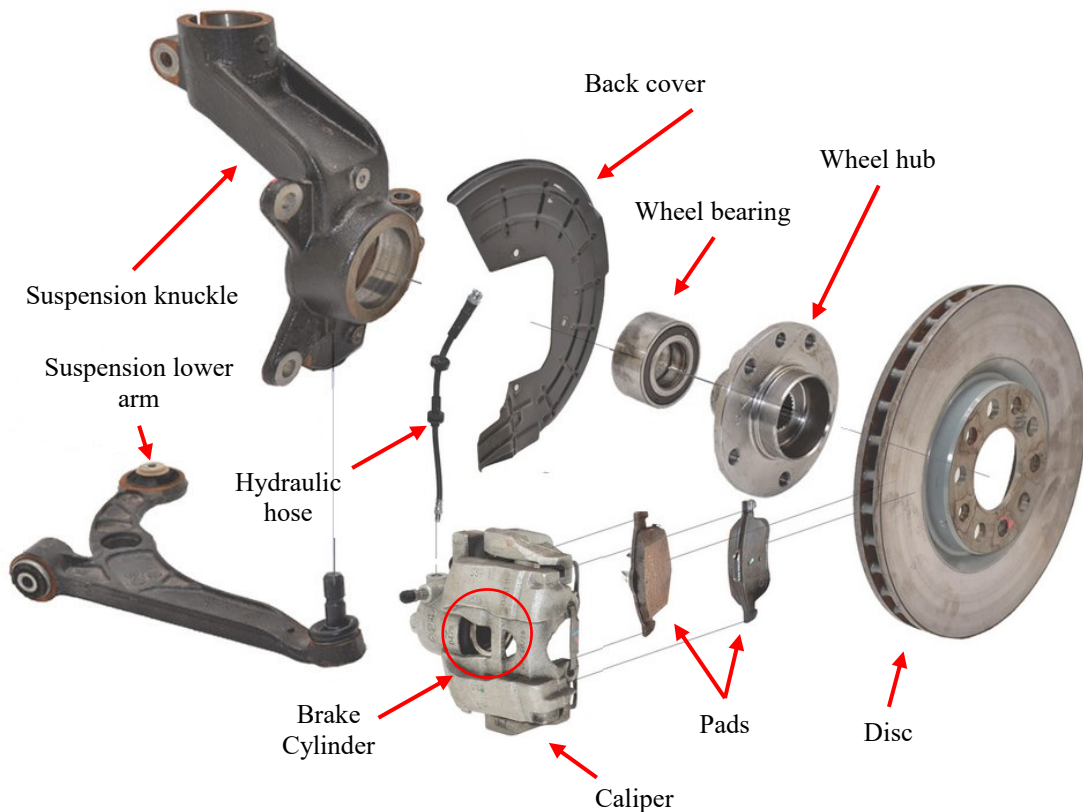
Disassembled view of a disk brake and of the supporting suspension components.
